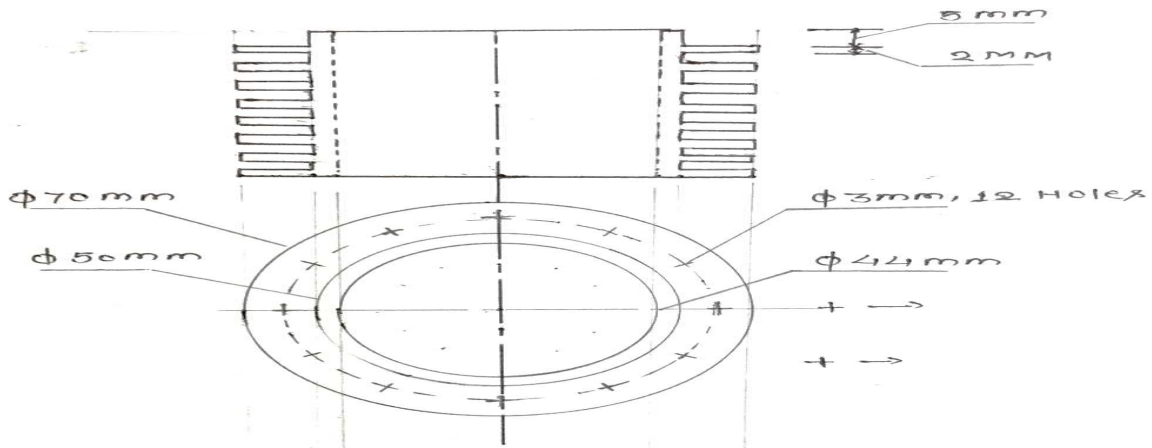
Geometrical specifications of engine cylinder fin with holes (Proposed model)
